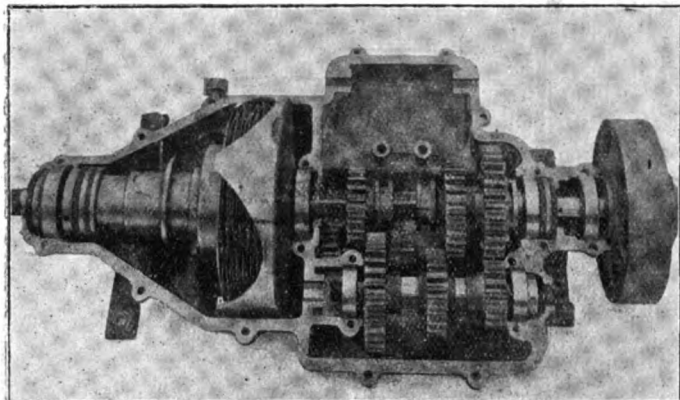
View of Clutch and Change Gear Box on Speedwell Cars.
